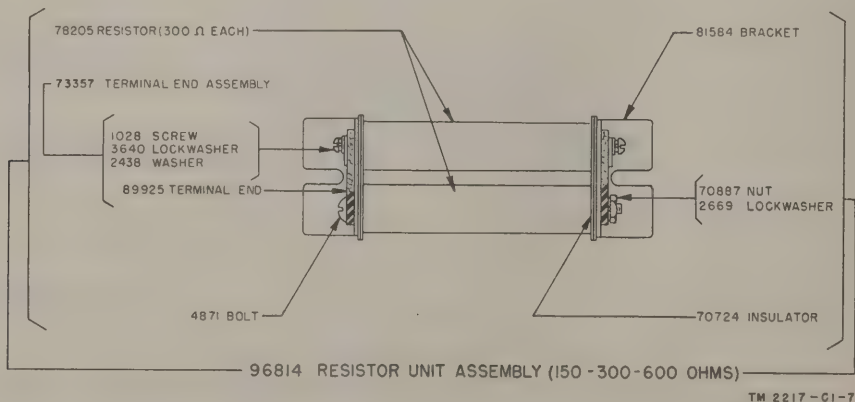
(Superseded.) Resistor unit assembly for DXD1 and DXD4, location of parts.
